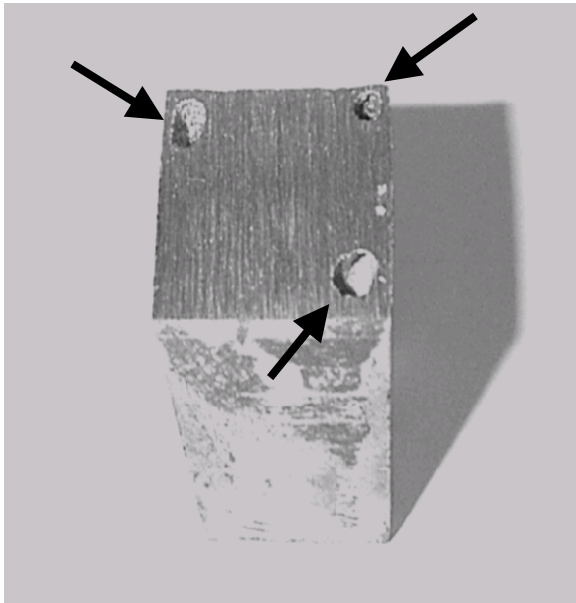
Surface reactions were reduced in the test pieces cast in a bed of Croning sand, but the cast pieces contained large gas holes close to the surfaces.
